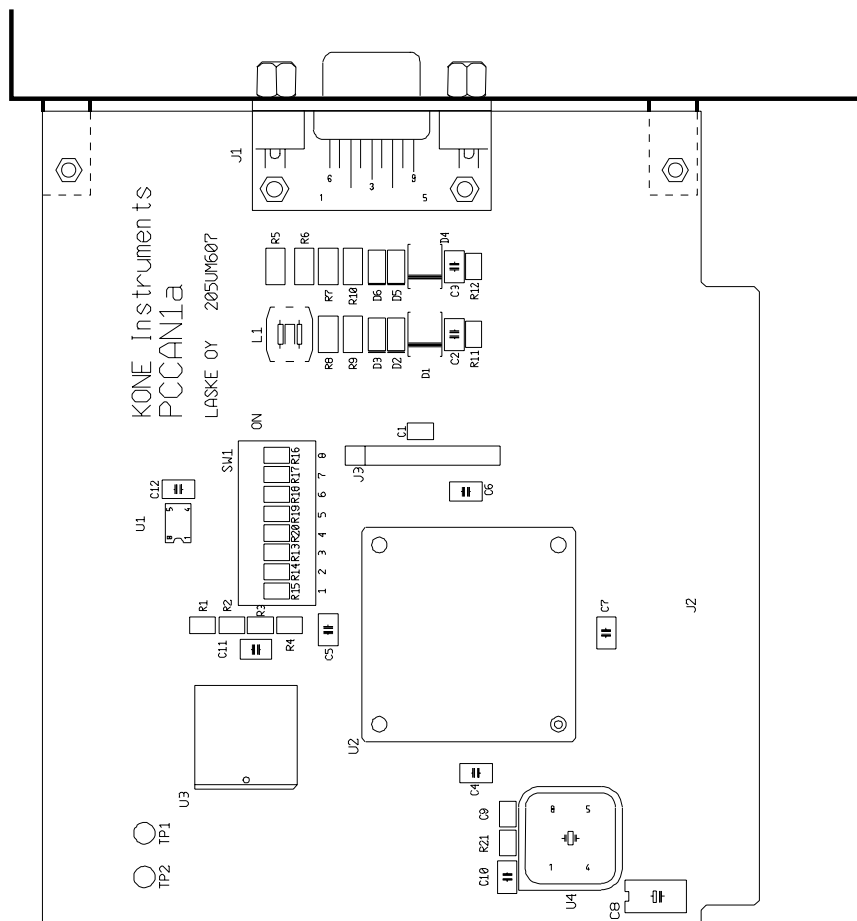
THE COMPONENT LAYOUT OF PCCAN1
